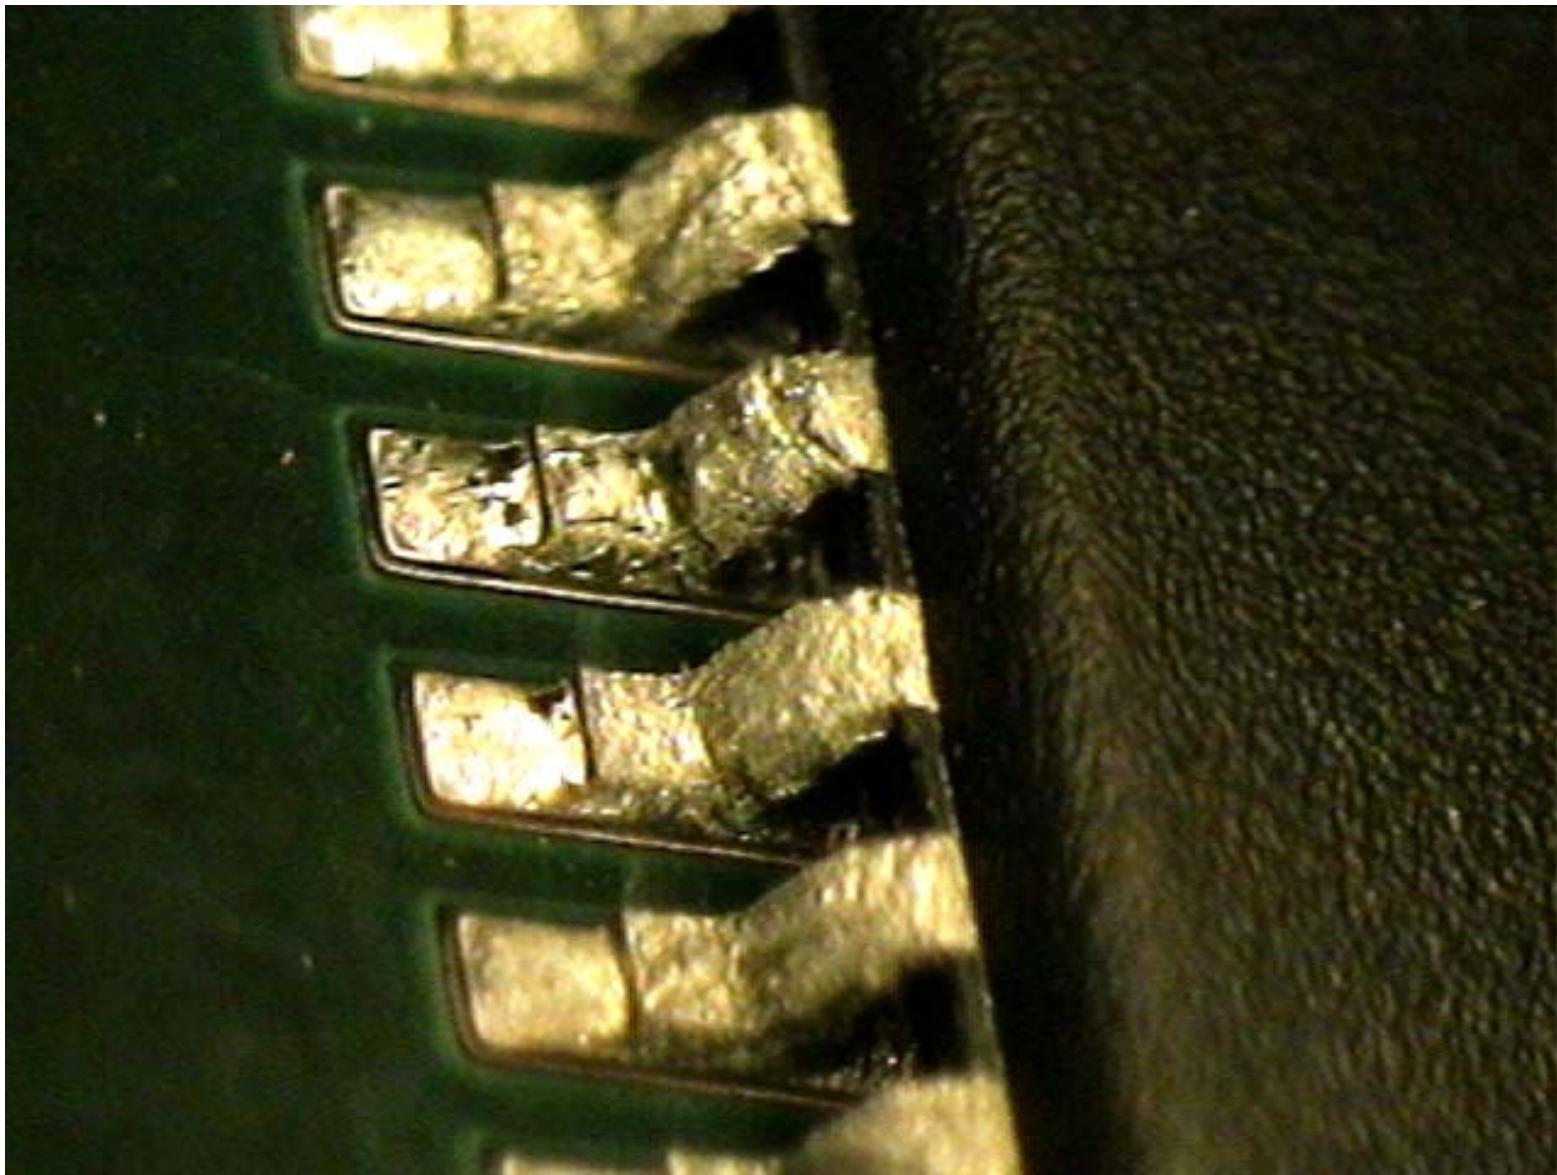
Vehicle ID 1, TSOP U16, SnPb Solder/SnPb Component Finish, 75x
